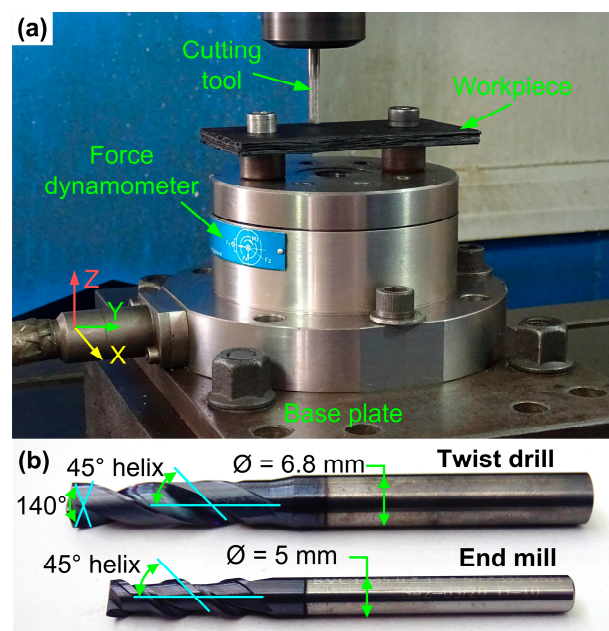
(a) Machining setup; (b) cutting tools for experimentation.
